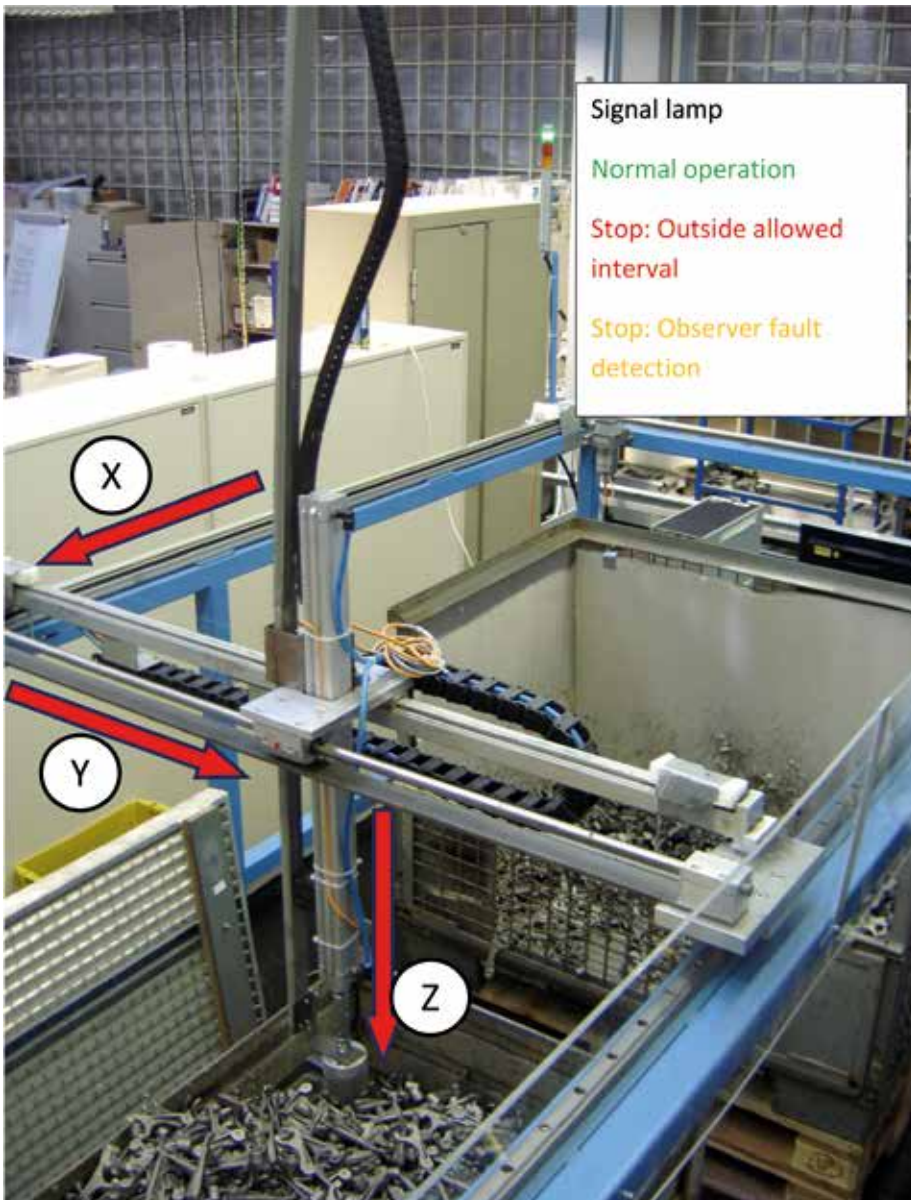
Pneumatic portal robot for loading and unloading iron workpieces.
